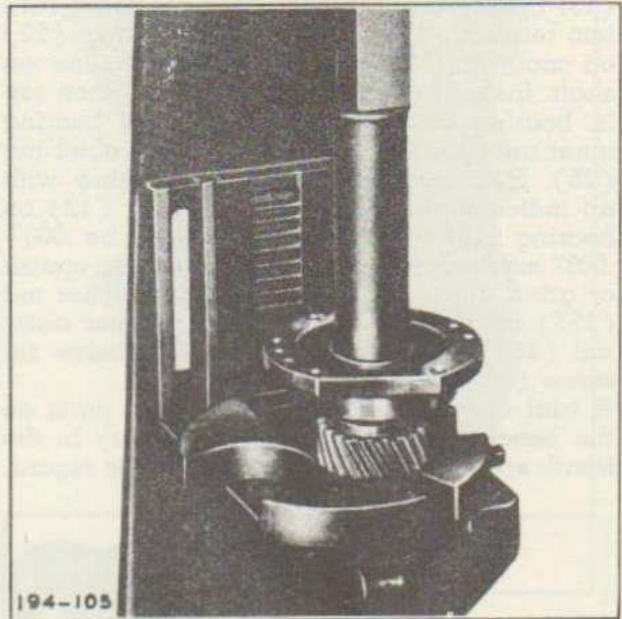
Pressing Spigot Bearing and Retainer on Pinion Assembly
